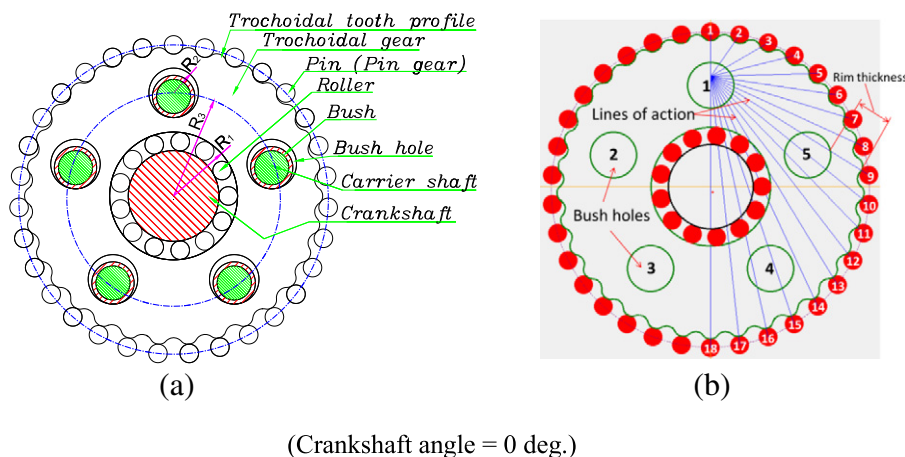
A typical structure concept of a trochoidal gear reducer.
